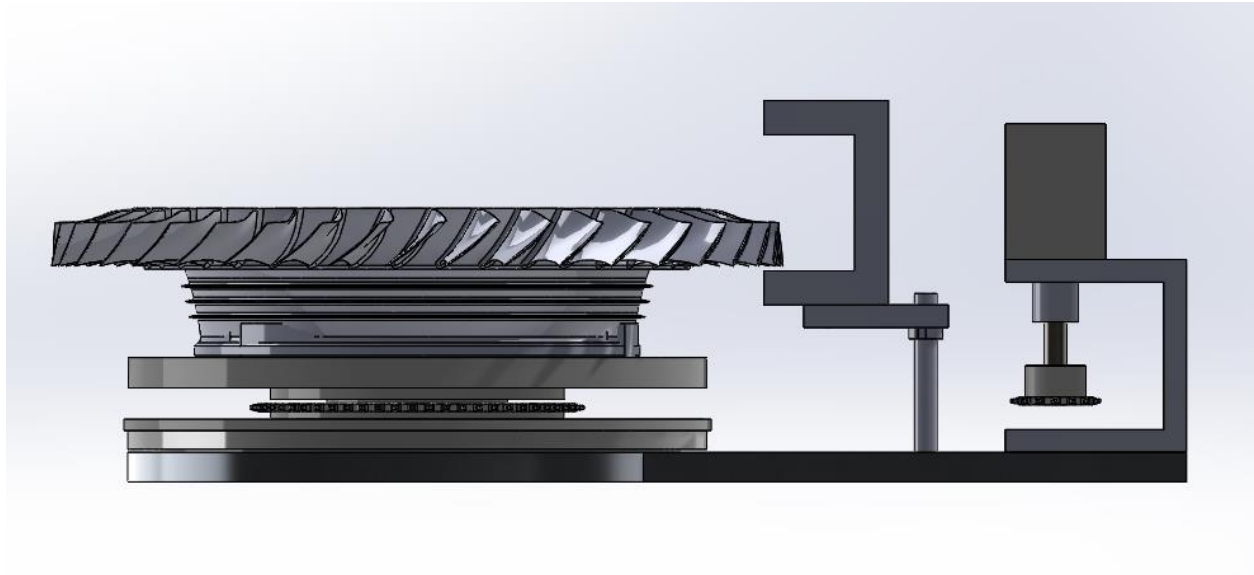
Side View of Turntable Assembly (shown w/o chain)
